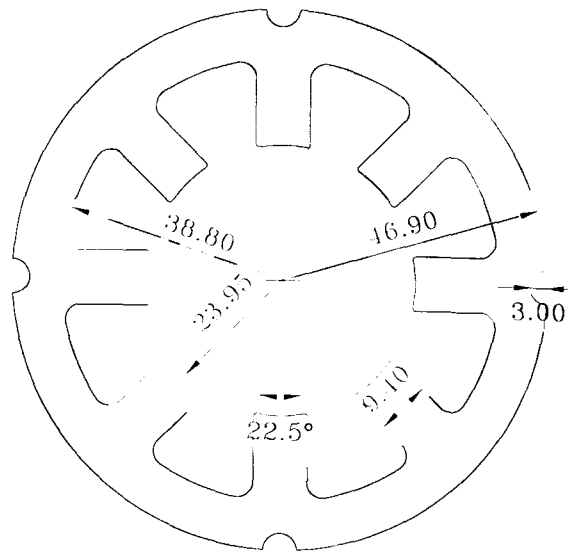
Details of 8-pole stator, Model VIIIa/b axial length 46.9mm, all dimensions in mm
